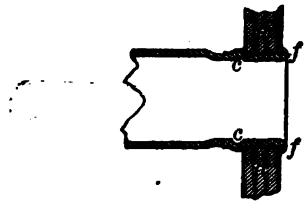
Section of End of Tube with Copper Ferrule. Scale  $\frac{1}{4}$  in.—1 in.
